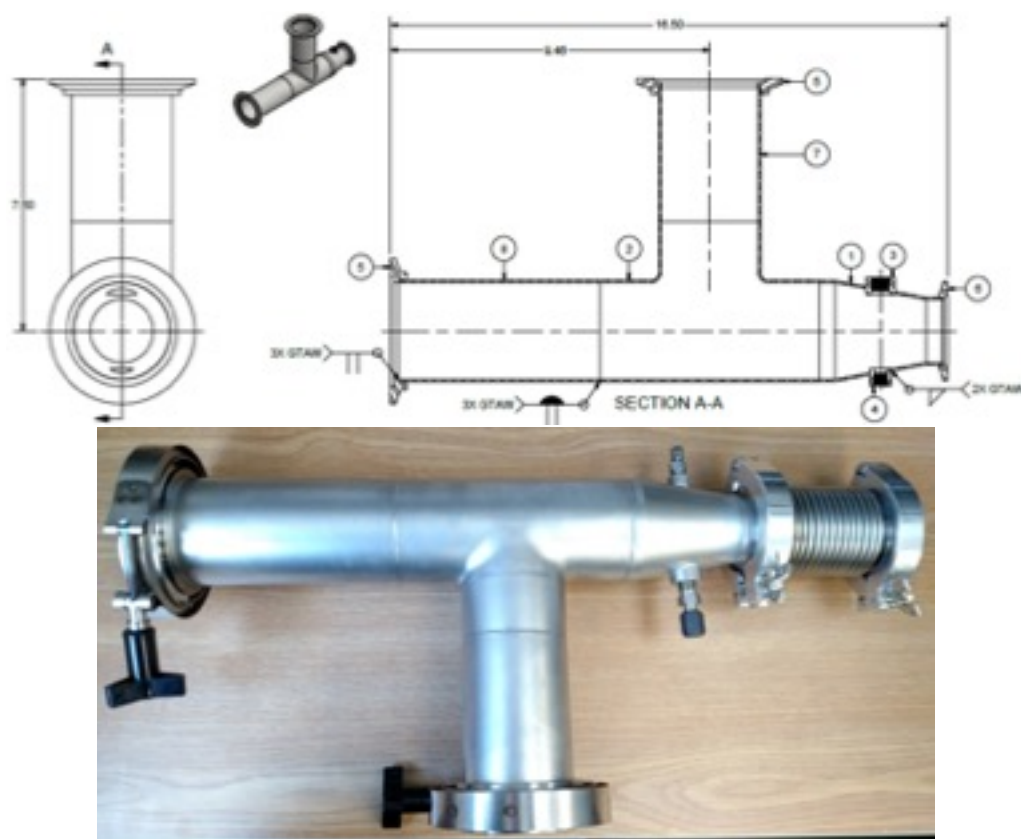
Design drawing and photo of mechanical testing atmospheric chamber
